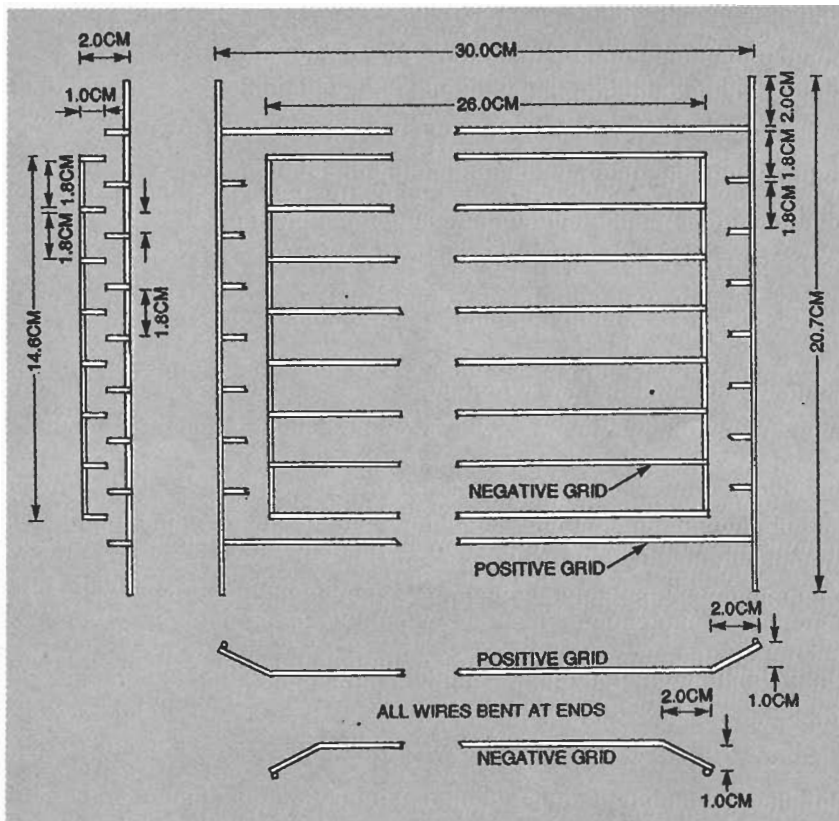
THE GRID for the solar-powered fly controller is fabricated from stiff wire that can be assembled with solder, brazing material, or by welding. No. 12 solid copper wire without insulation is a good choice. It forms easily and solders well with a 100-watt iron. (Note: 2.54 cm equals 1.0 inch.)
